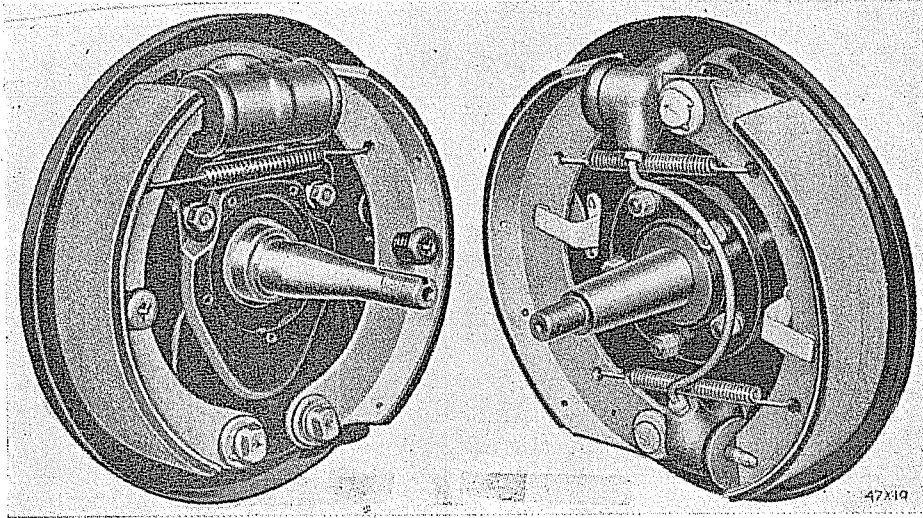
Typical Front and Rear Brake Assemblies (Model 1-08A Only).
